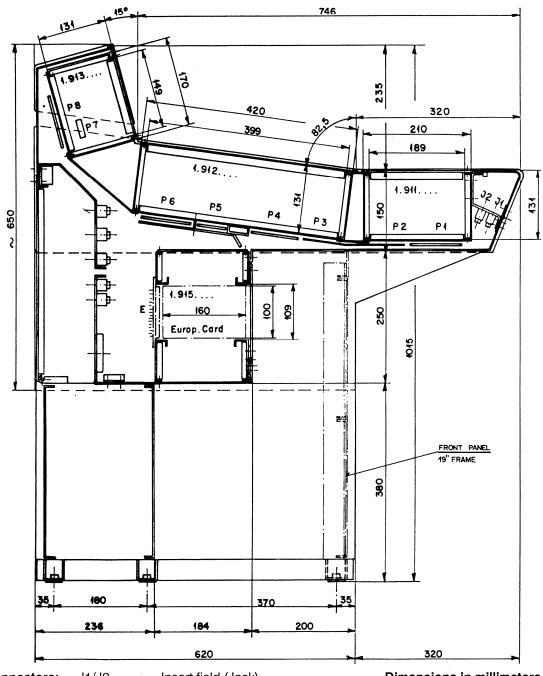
Dimension drawing of the two chassis widths for the two basic versions with 3 and 4 module sections respectively.
